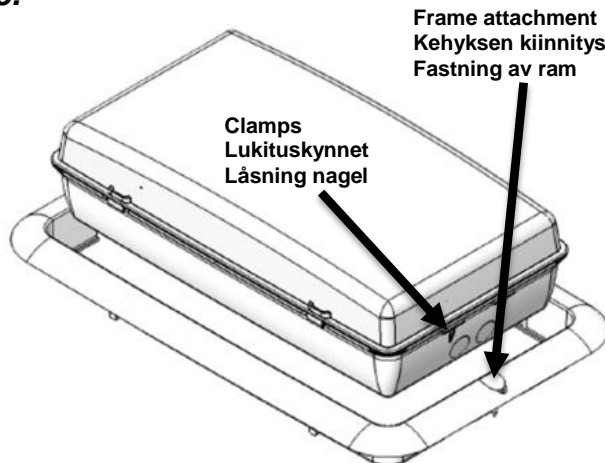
Recessed mounting, mounting hole 350 mm x 215 mm
